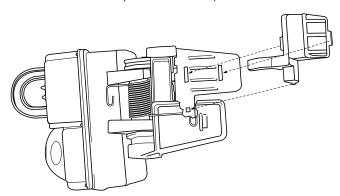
Remove clamp pads attached to each clamping arm on a mechanism where cable diameter exceeds 1"
